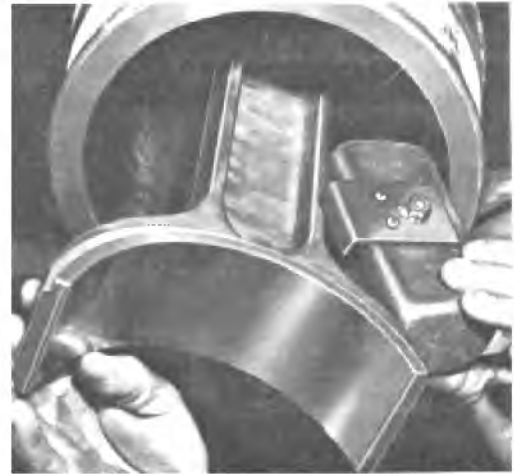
Connecting Rod Positioning Clamp Application
